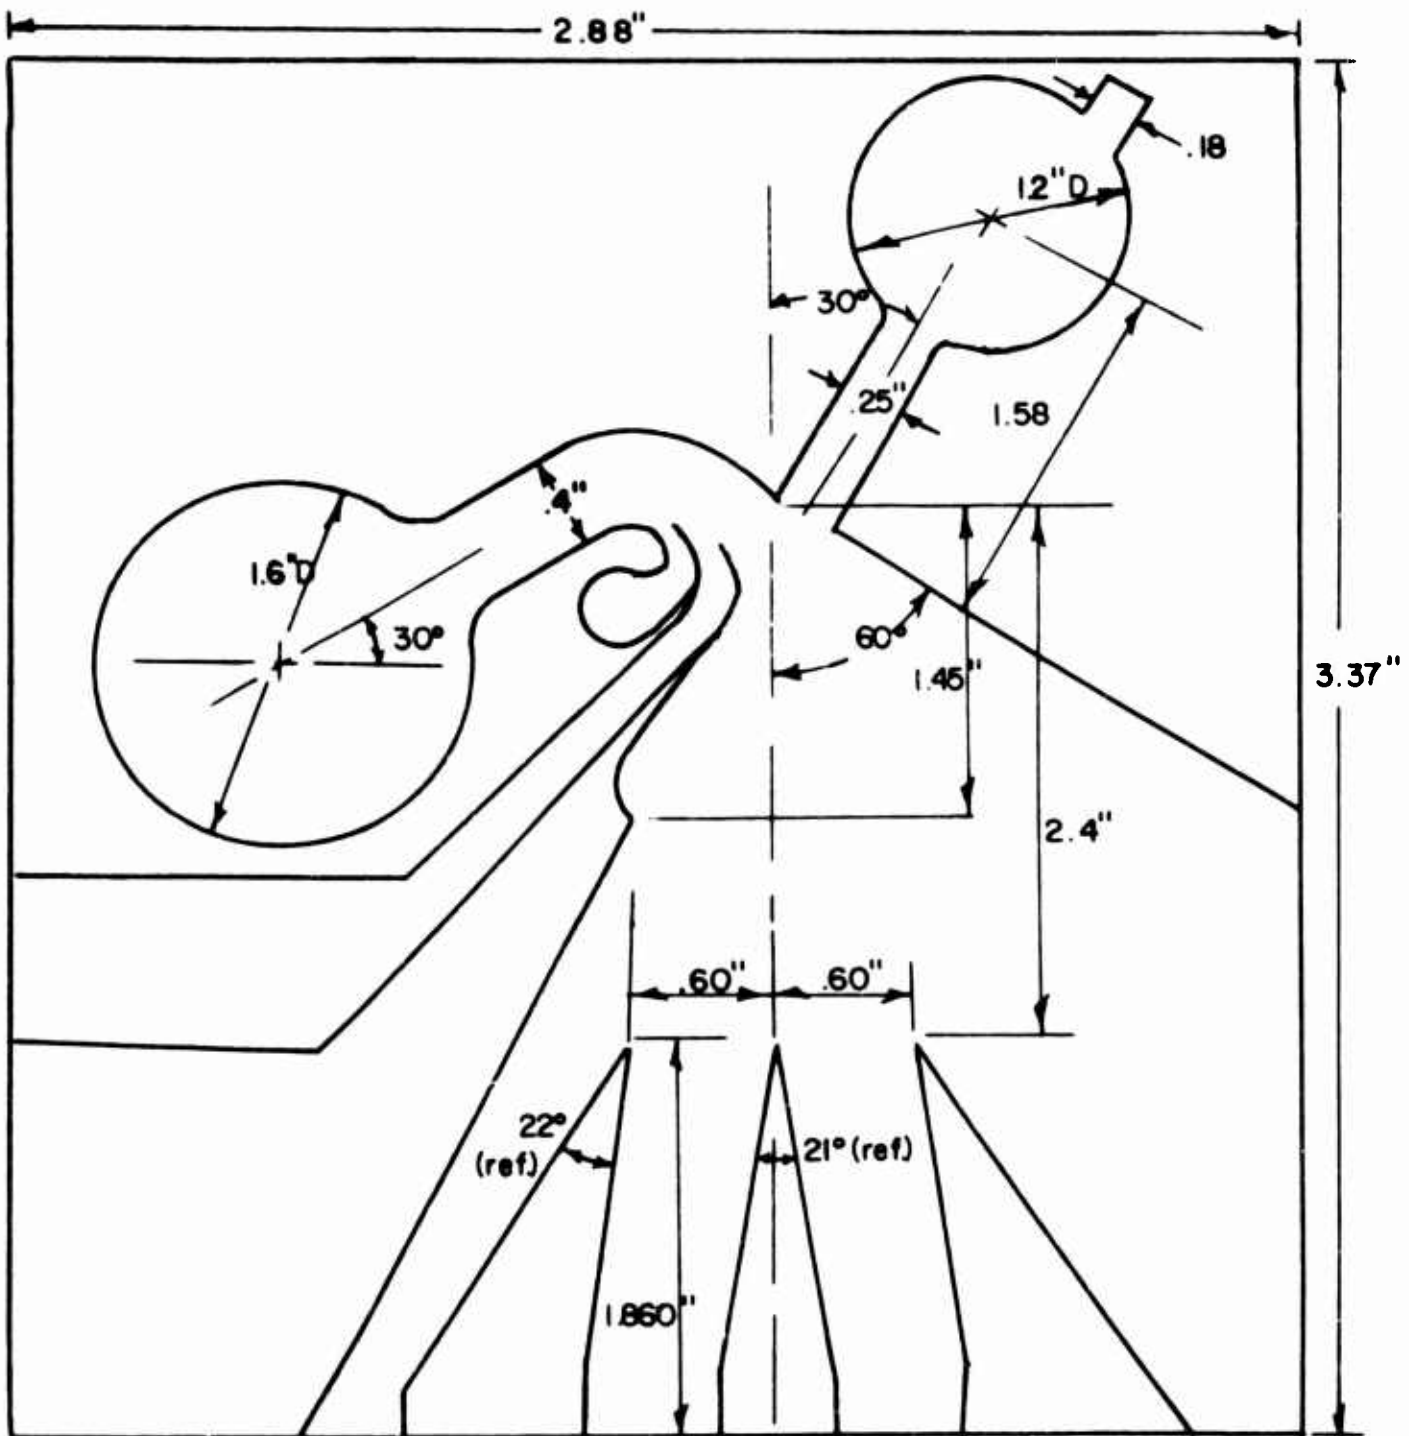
DOUBLE - SIZE DIMENSIONAL DRAWING OF VENTED ELBOW AMPLIFIER.
